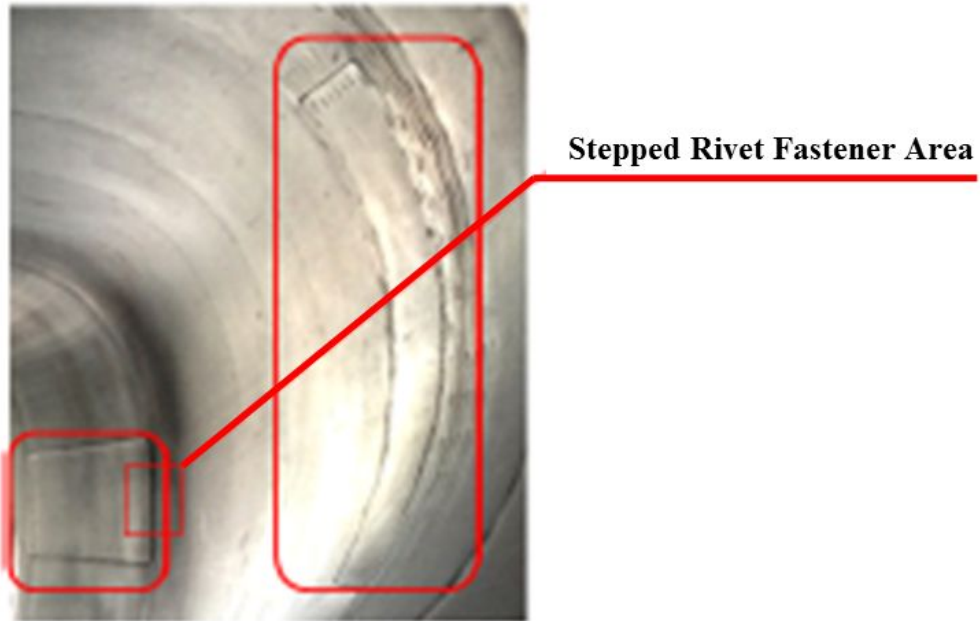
4 Stepped rivet fastener area in air inlet duct
